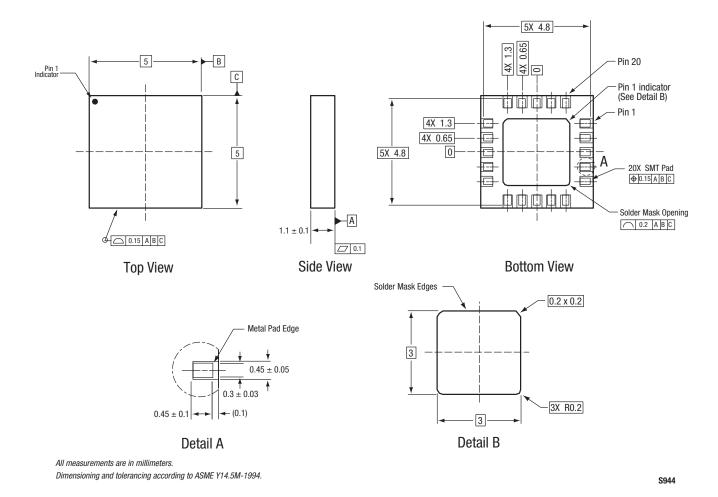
SKY73070 20-Pin MCM Package Dimensions
